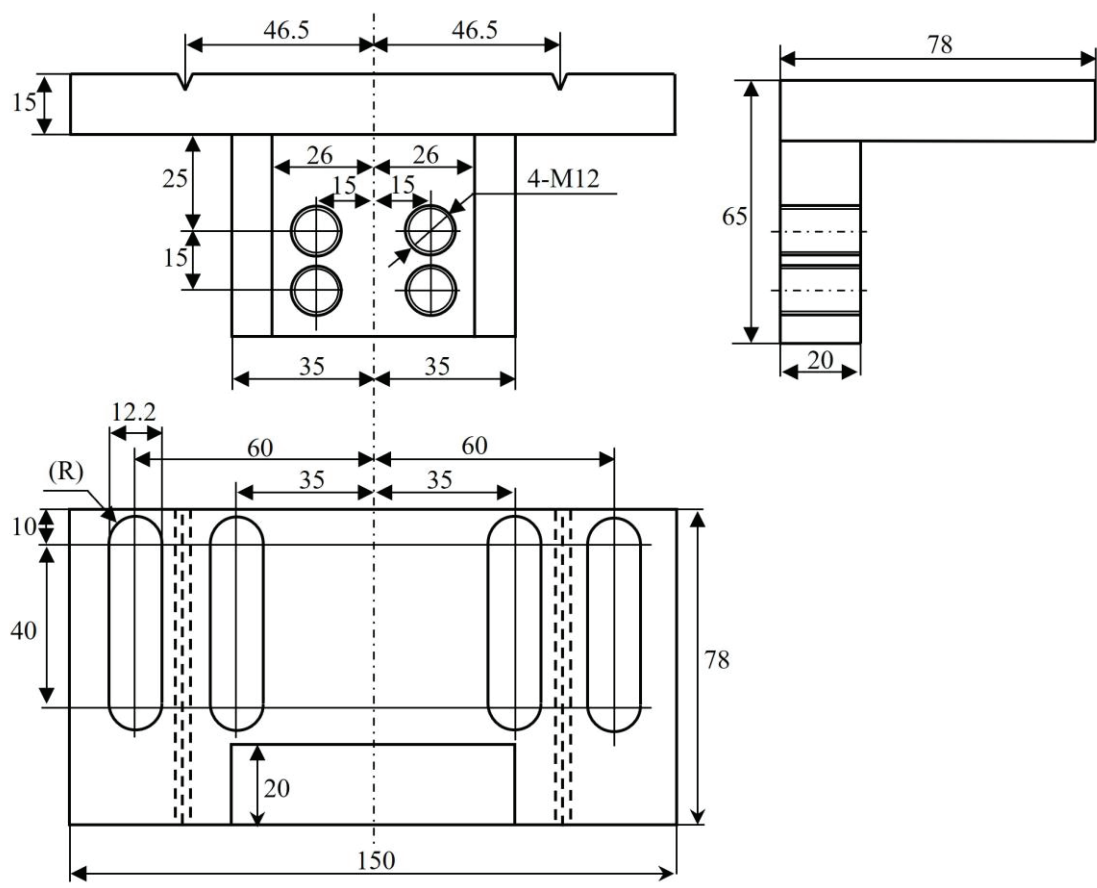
Jig4 for one-sided welding of the fillet joint (unit : mm)
